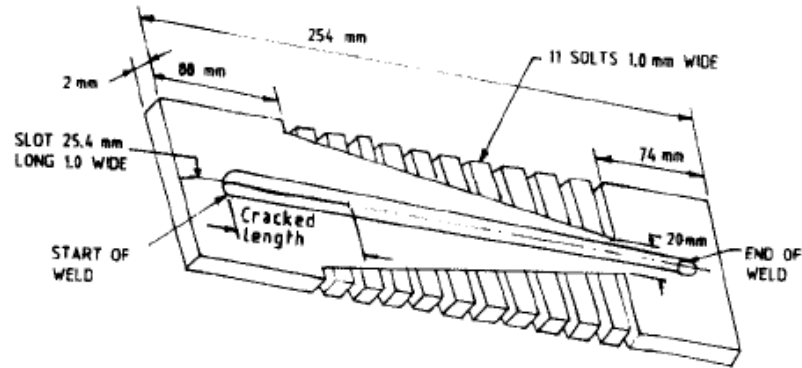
Houldcroft dimensions for evaluating the weldability of scandium in aluminium alloy used by Madhusudham [27].
